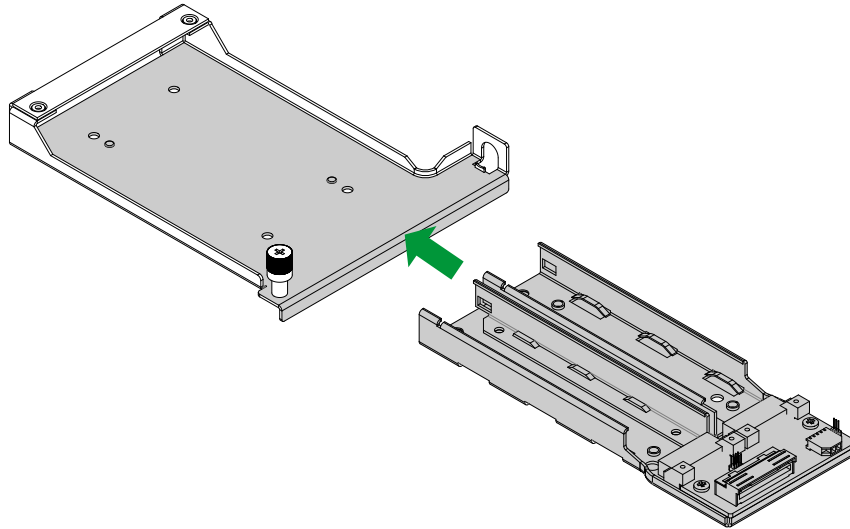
Slide the Carrier Module Onto the Holder Bracket
